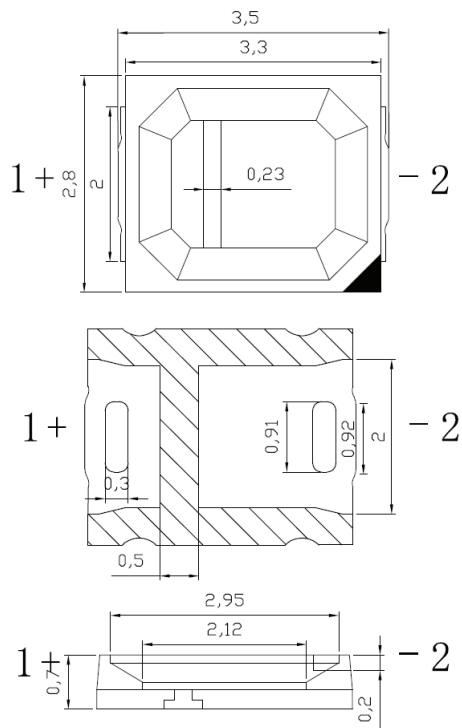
Mechanical dimensions for L128-xxxxRB35000A1, L128-xxxxRC35000A1, L128-xxxxRC35000B1, L128-xxxxRC35000C1, L128-xxxxRD35000A1, L128-xxxxRD35000B1, and L128-xxxxRE35000A1.
